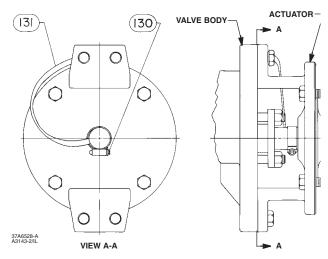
Optional Shaft-to-Body Bonding Strap Assembly
